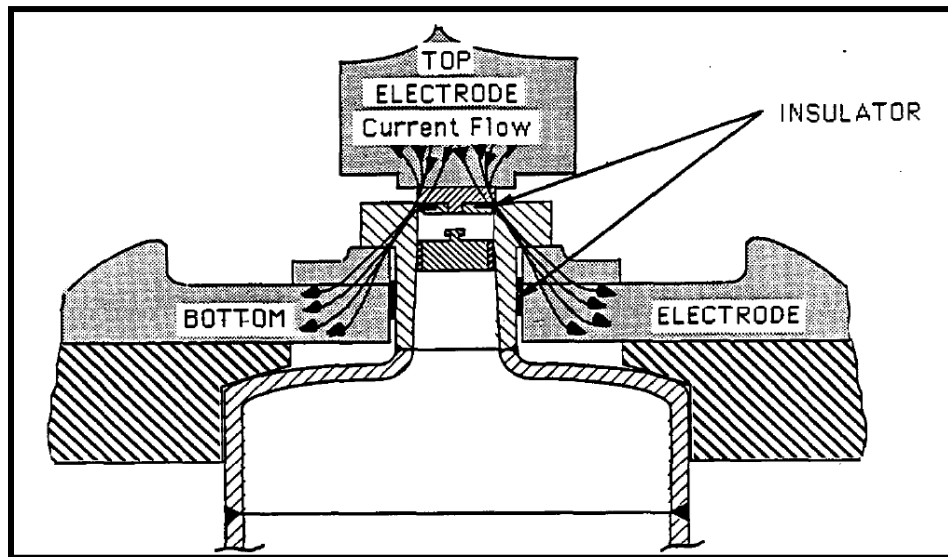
Load Path and Electrical Current Path During Plug Weld.
